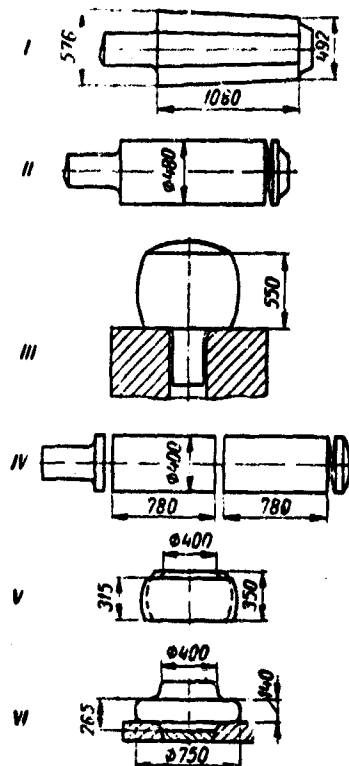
Technological forging pattern for producing wheel from ingot weighing 2.5 t. I-VI) Forging sequence.
